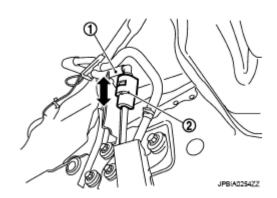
Removing Quick Connector Cap From Quick Connector Connection Courtesy of NISSAN MOTOR CO., U.S.A.
